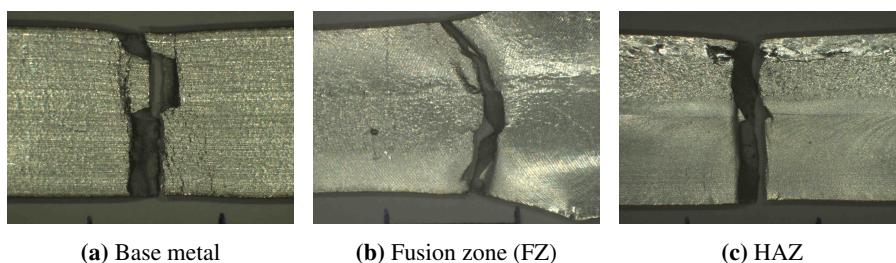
Macro images of the tensile specimens tested longitudinal to the welding/extrusion direction.
